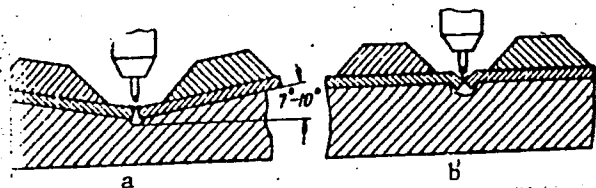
Setup for welding with controlled direction of warping by angular backing bar (a) or by flanging the sheets (b)
